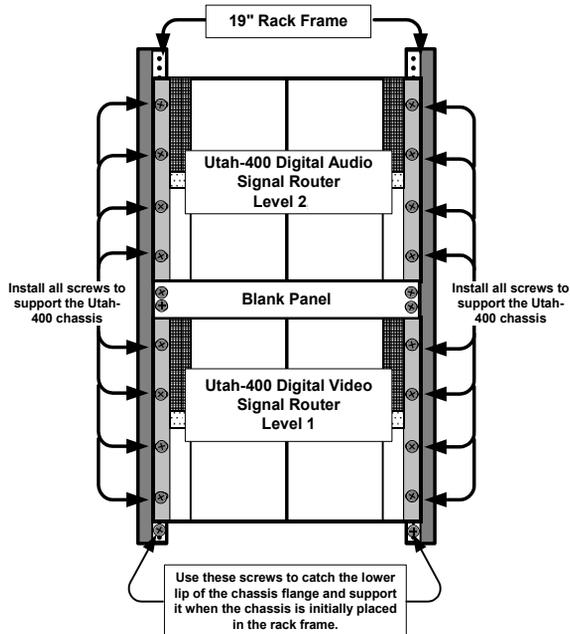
Utah-400 Chassis Mounted in 19" Rack Frame
